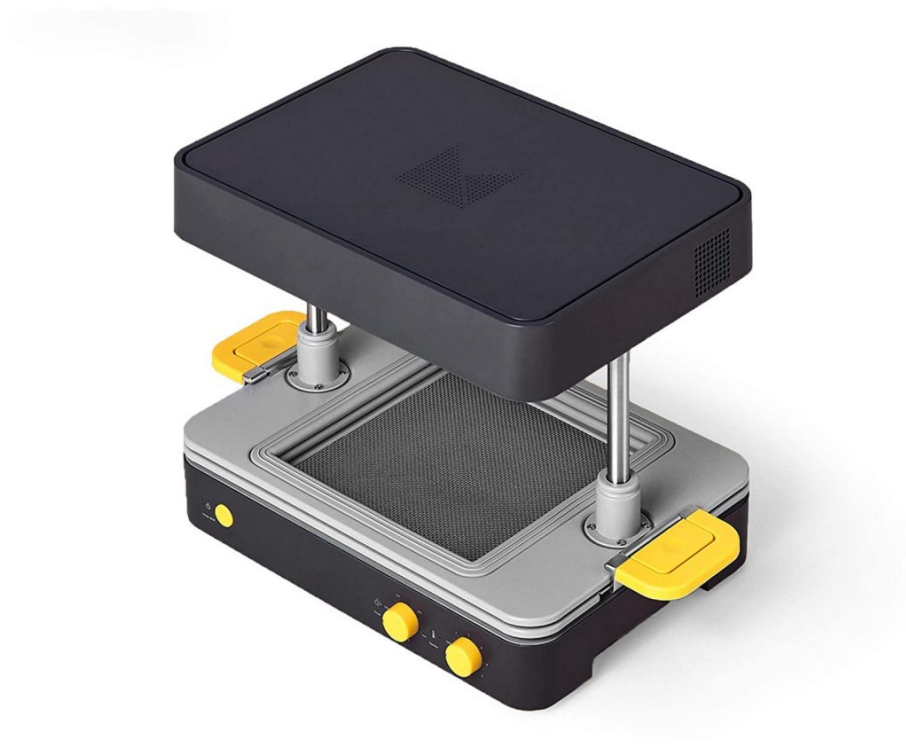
The Makyu vacuum former used to manufacture fullscale camera housings.
